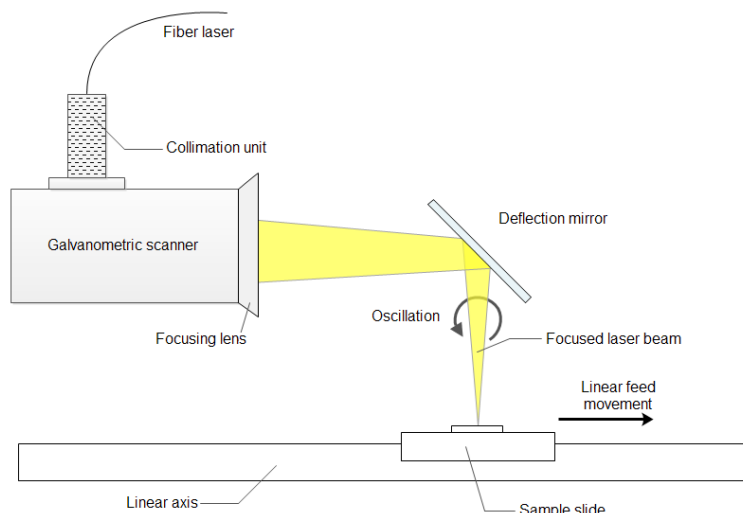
Schematic sketch of a laser welding setup [14]
